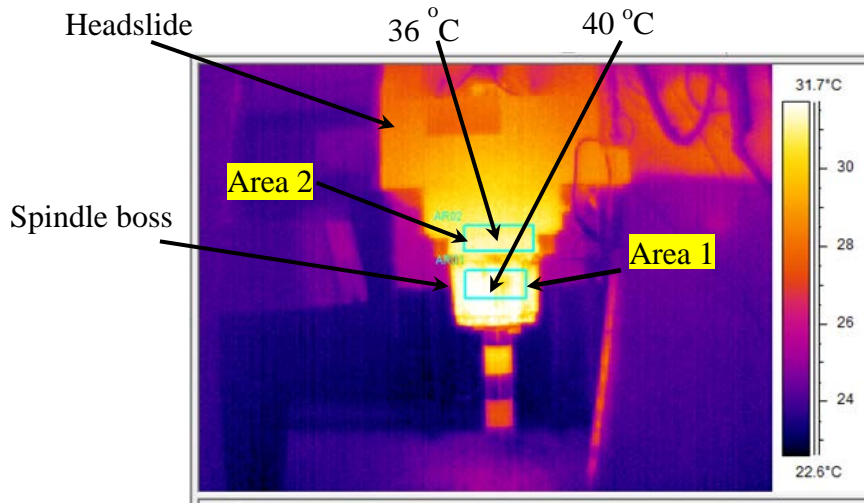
Thermal imaging of spindle boss and headslide of machine tool
